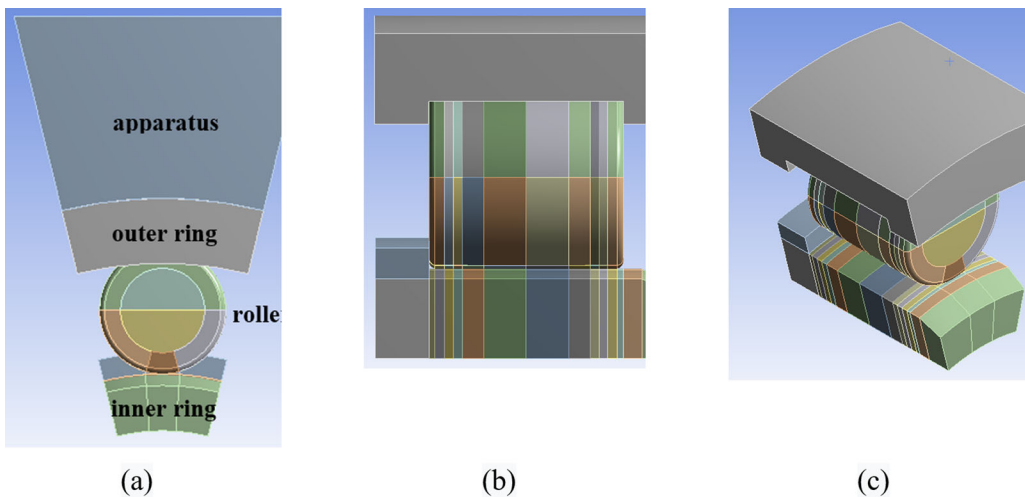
1/13 sector of the full bearing model. (a) Front view, (b) side view, (c) isometric view.
